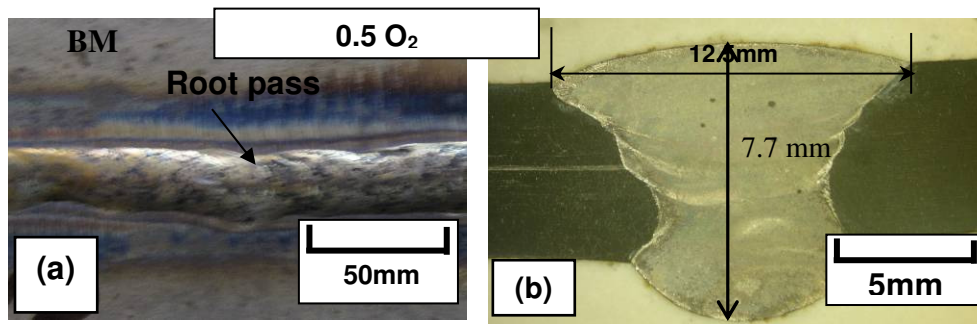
Photograph of root side (a) and macrograph of a cross section (b) of GTA welded joint produced using 0.5% oxygen in purging gas, 125A welding current, 14V welding voltage, 135 mm/min welding speed and 15 l/min argon shielding.
